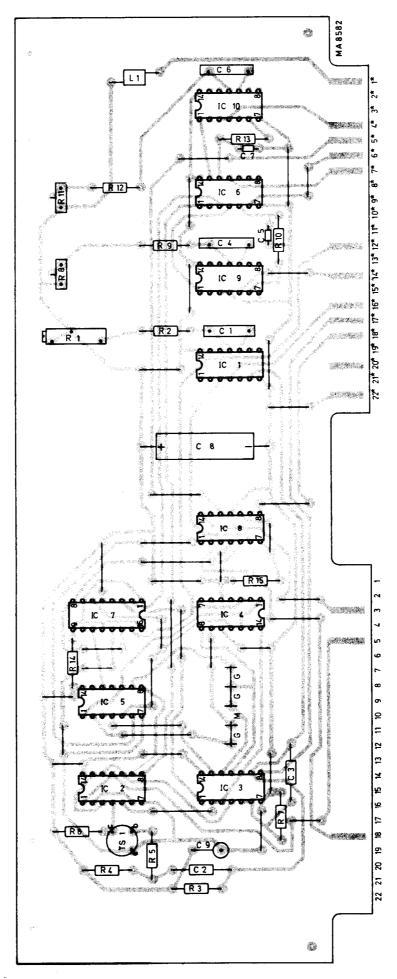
Printed wiring board, vertical divider, unit 4
